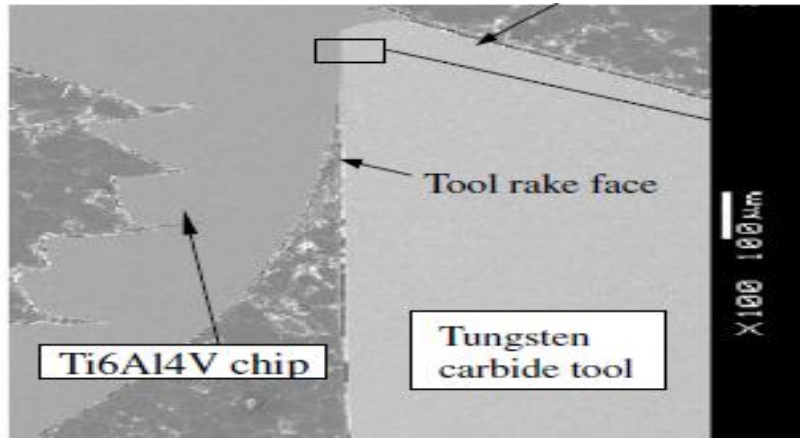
SEM image of a TA6V chip stuck on rake face of the tungsten carbide tool
